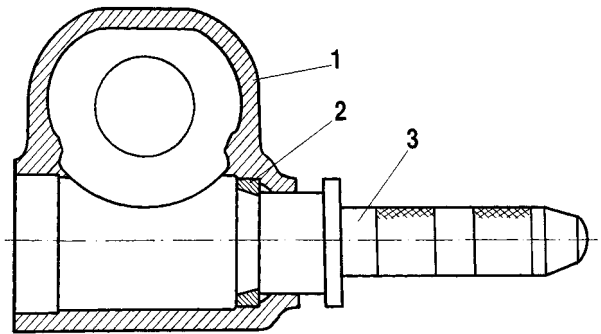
Removing the outer ring of the worm upper bearing using tool 67.7853.9541:
